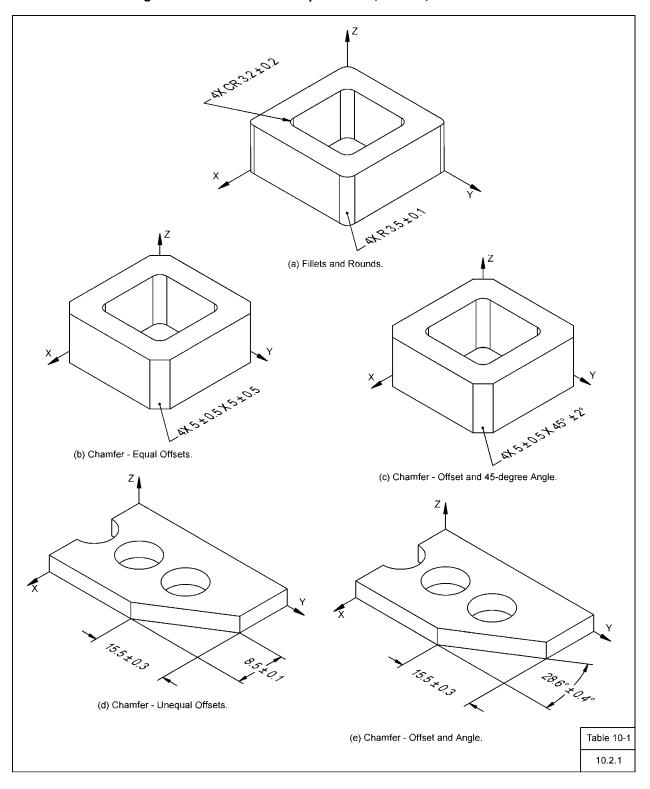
Attachment Techniques: Fillets, Rounds, and Chamfers
